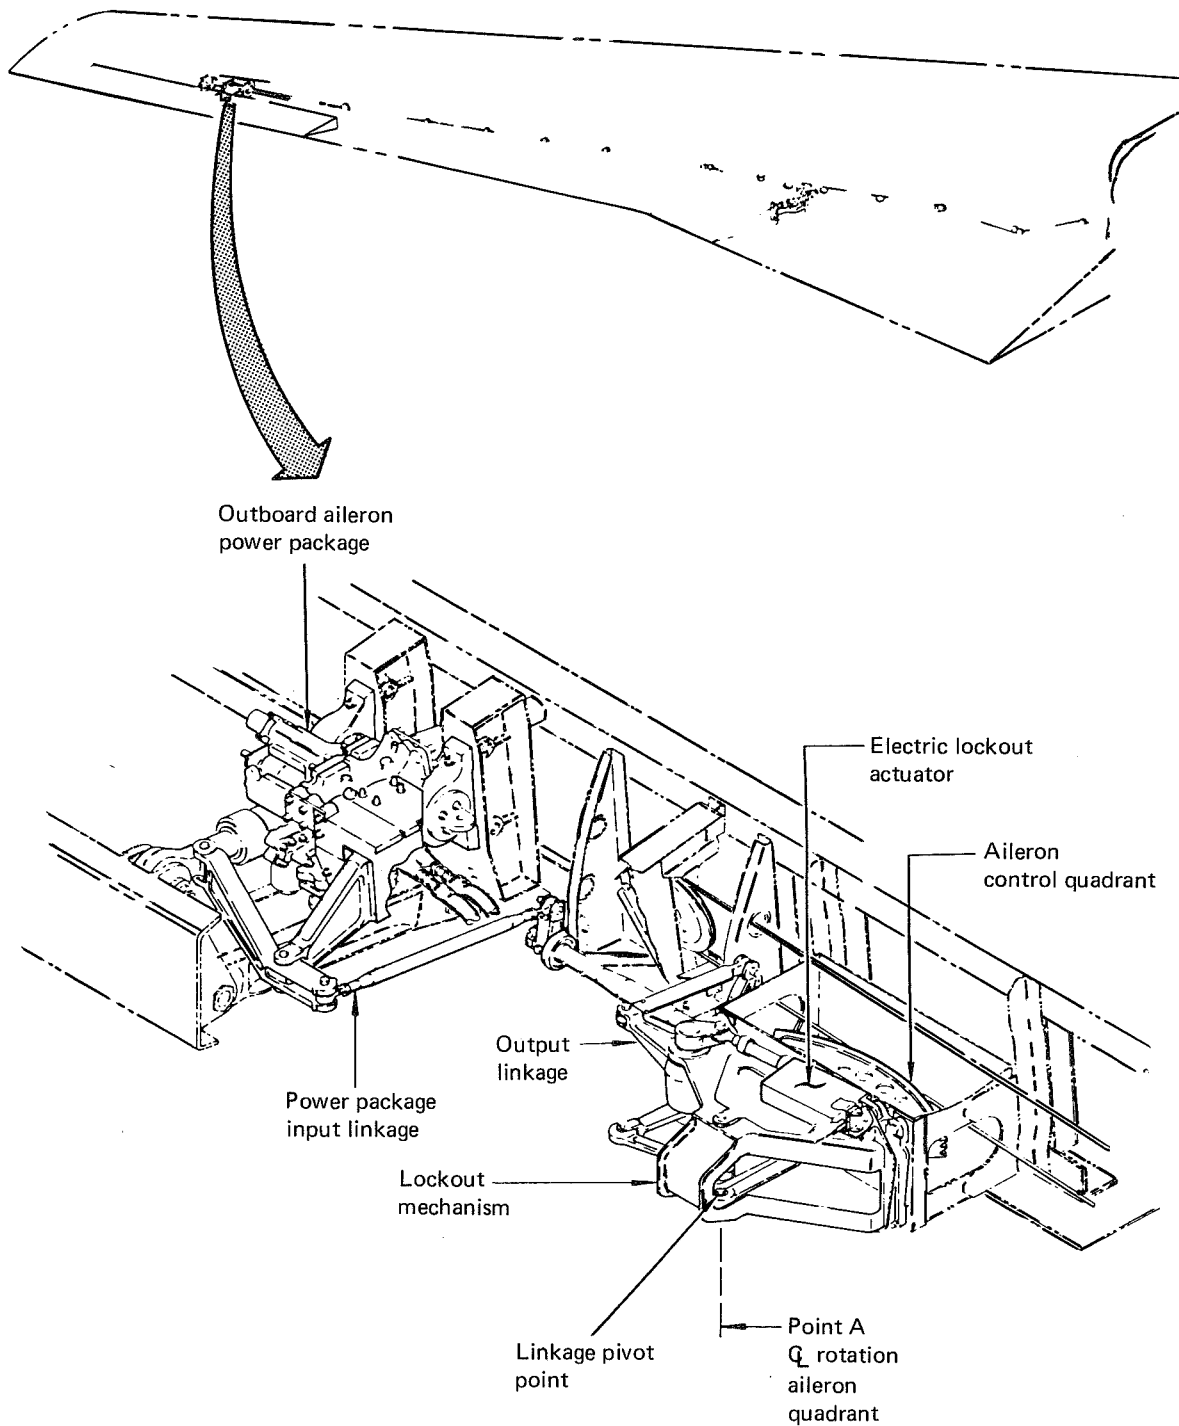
Existing Outboard Aileron PCU and Lockout Mechanism
